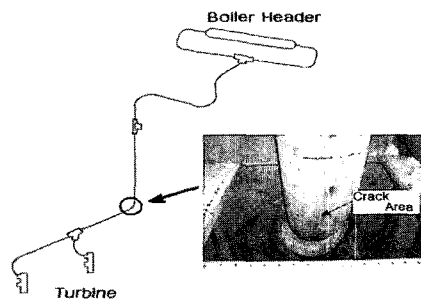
Drawing of Main steam pipeline and crack damaged location
